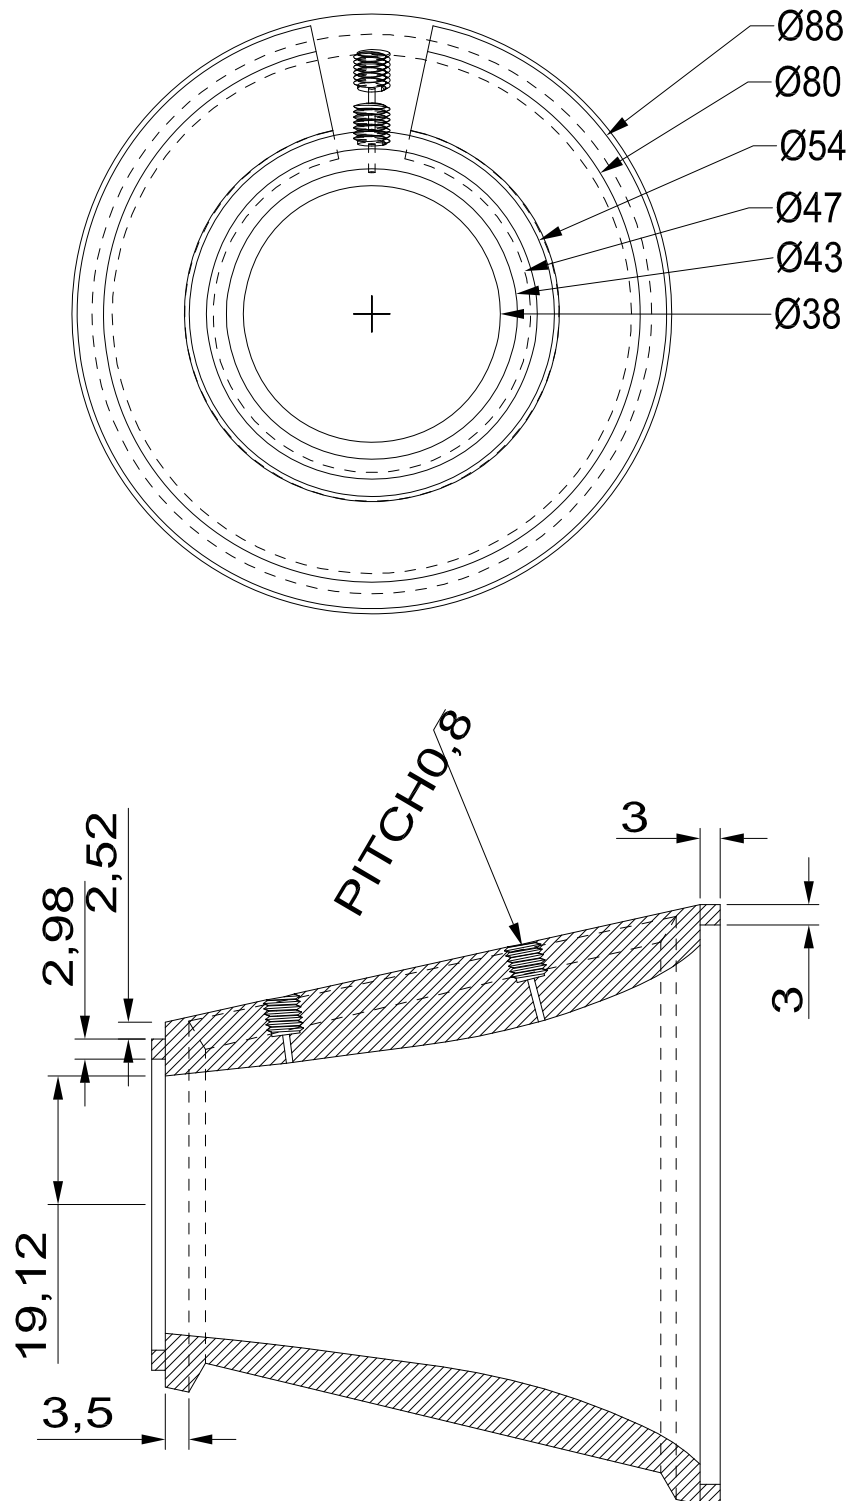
Profile of the part 6 of CRMC ejector with main dimensions, all dimensions in mm.
